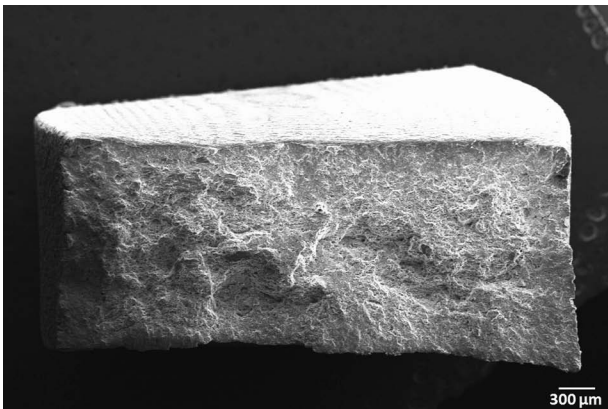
Fracture surface of room temperature aluminum alloy AA 2014-T6 sheet-90° tensile-tested specimen taken at low magnification
